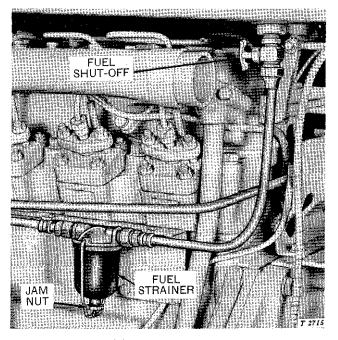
Fuel Shut-Off Valve and Fuel Strainer (Diesel (Illustrated)
